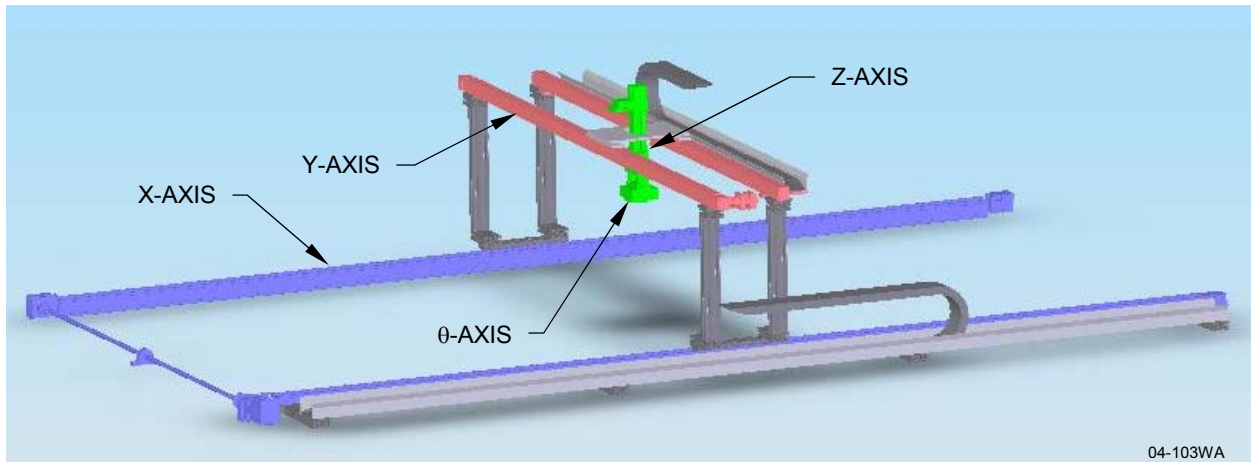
CAD model of four-axis Cartesian robot for busing assembly.
